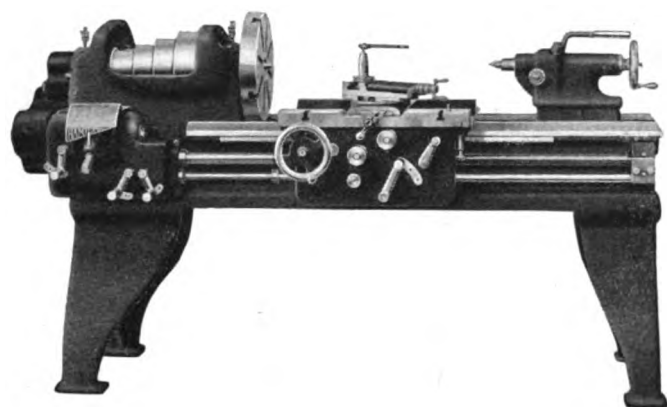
"Hamilton" 14"x6" Cone Head, Quick-Change Gear-Lathe with Single Back Gears and Compound Rest
